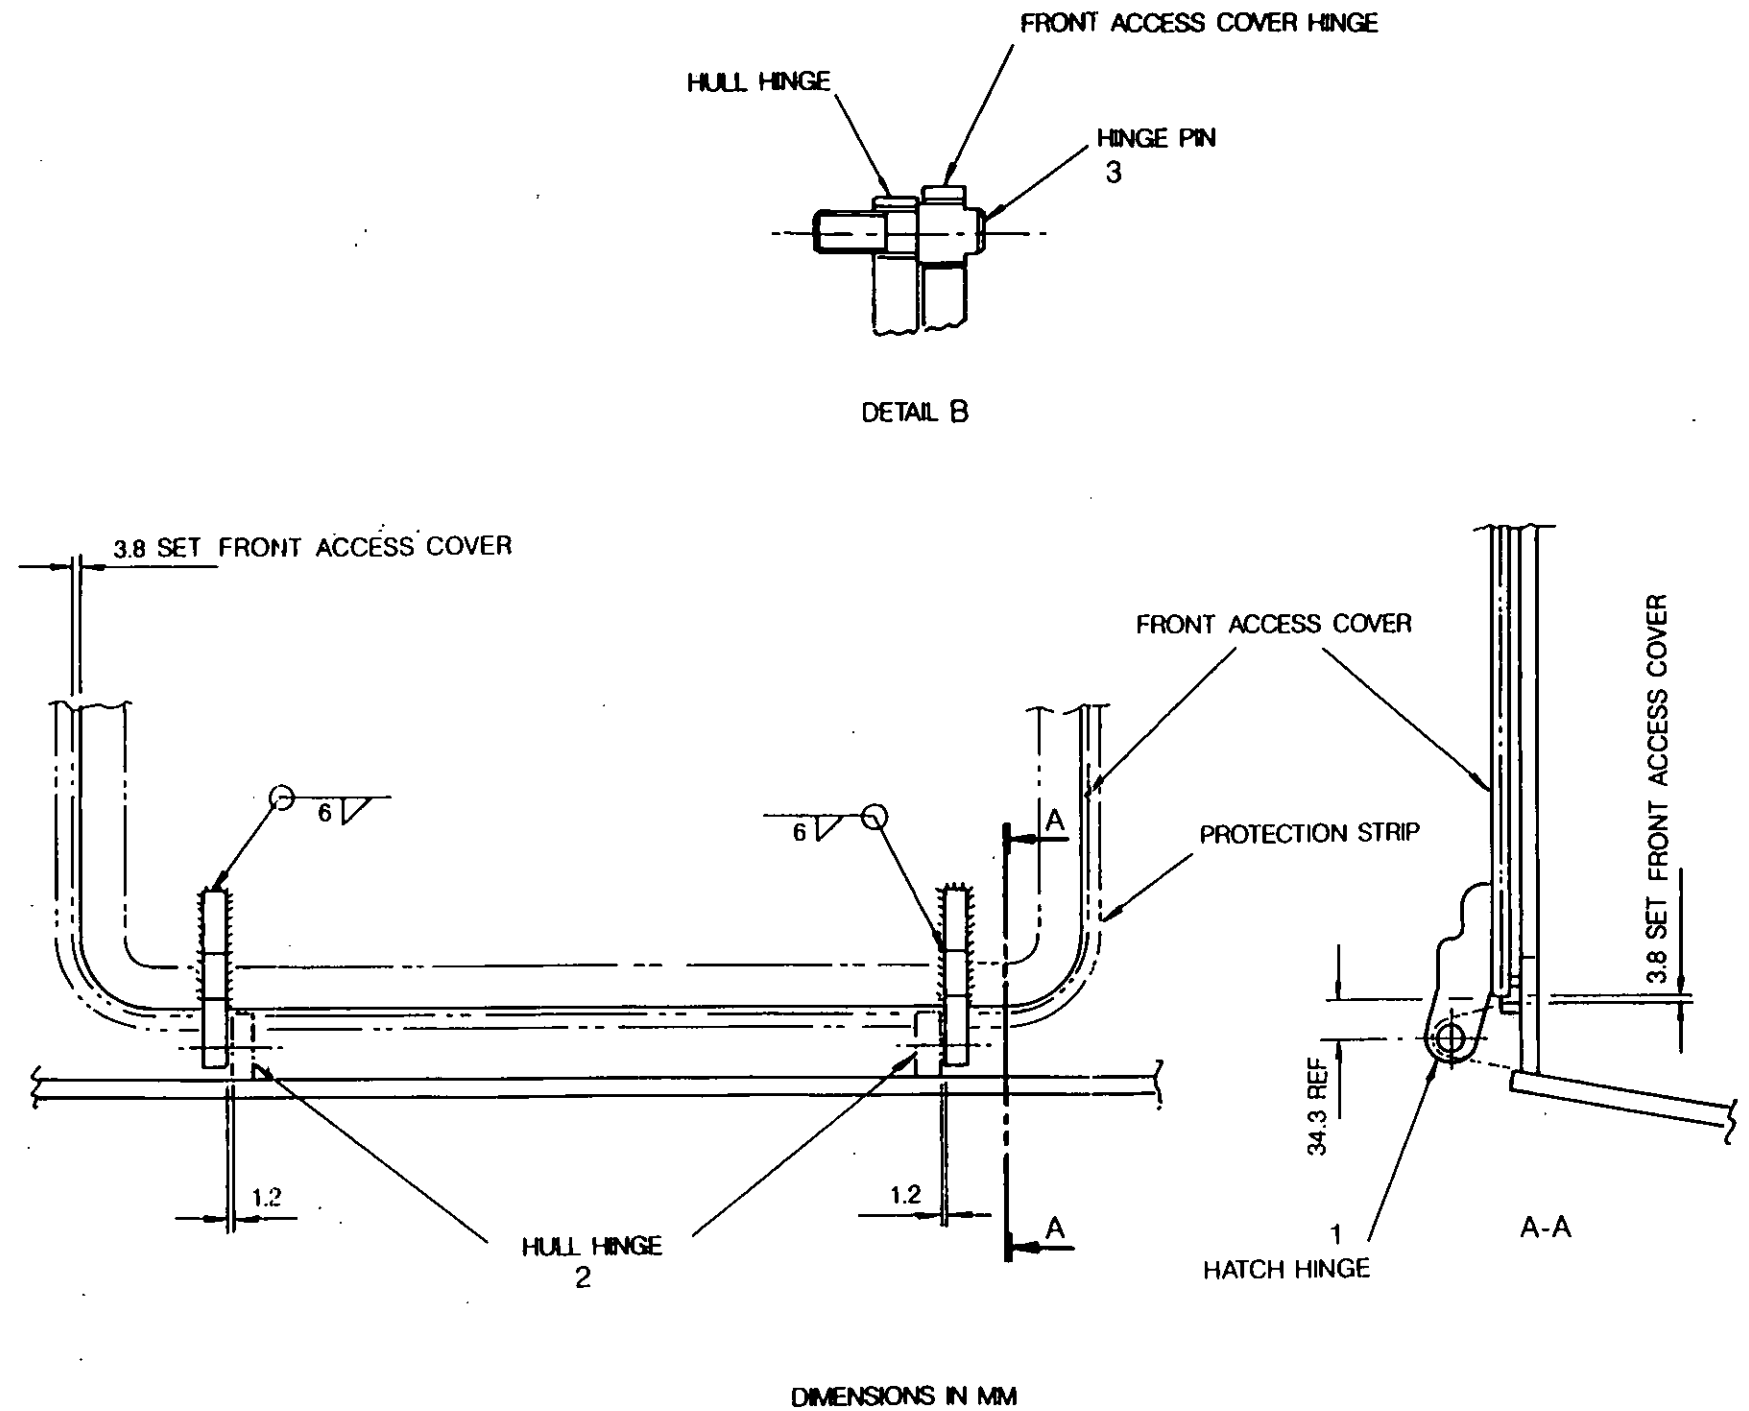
Replacement of the front access cover hinges (hatch), set from the hull hinges
